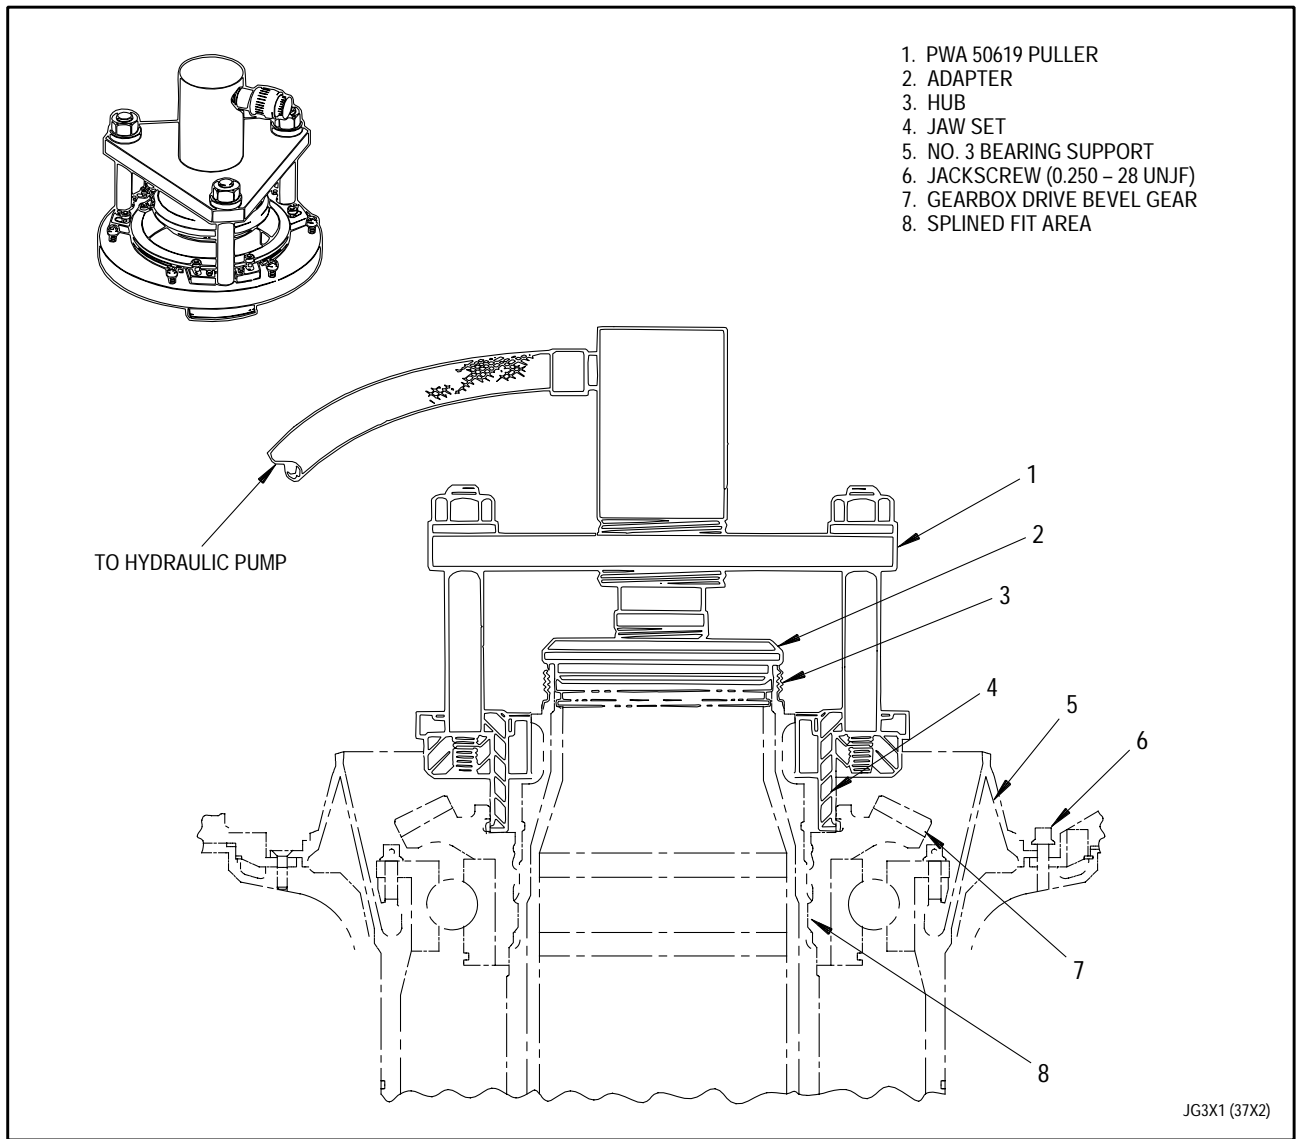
No. 3 Bearing Package - Removal with PWA 50619 Puller
